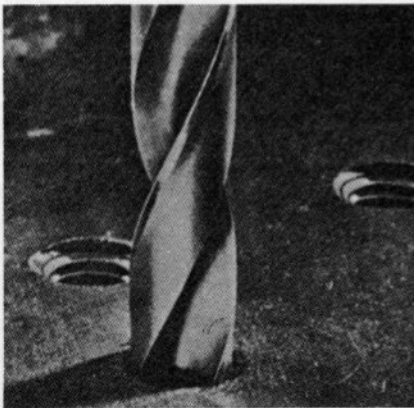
First step in repairing damaged threads is to drill out old threads using exact size drill recommended in instructions provided with thread repair kit. Drill all the way through an open hole or all the way to bottom of blind hole, making sure hole is straight and that centerline of hole is not moved in drilling process. (Series of photos provided by Heli-Coil Corp., Danbury, Conn.)
